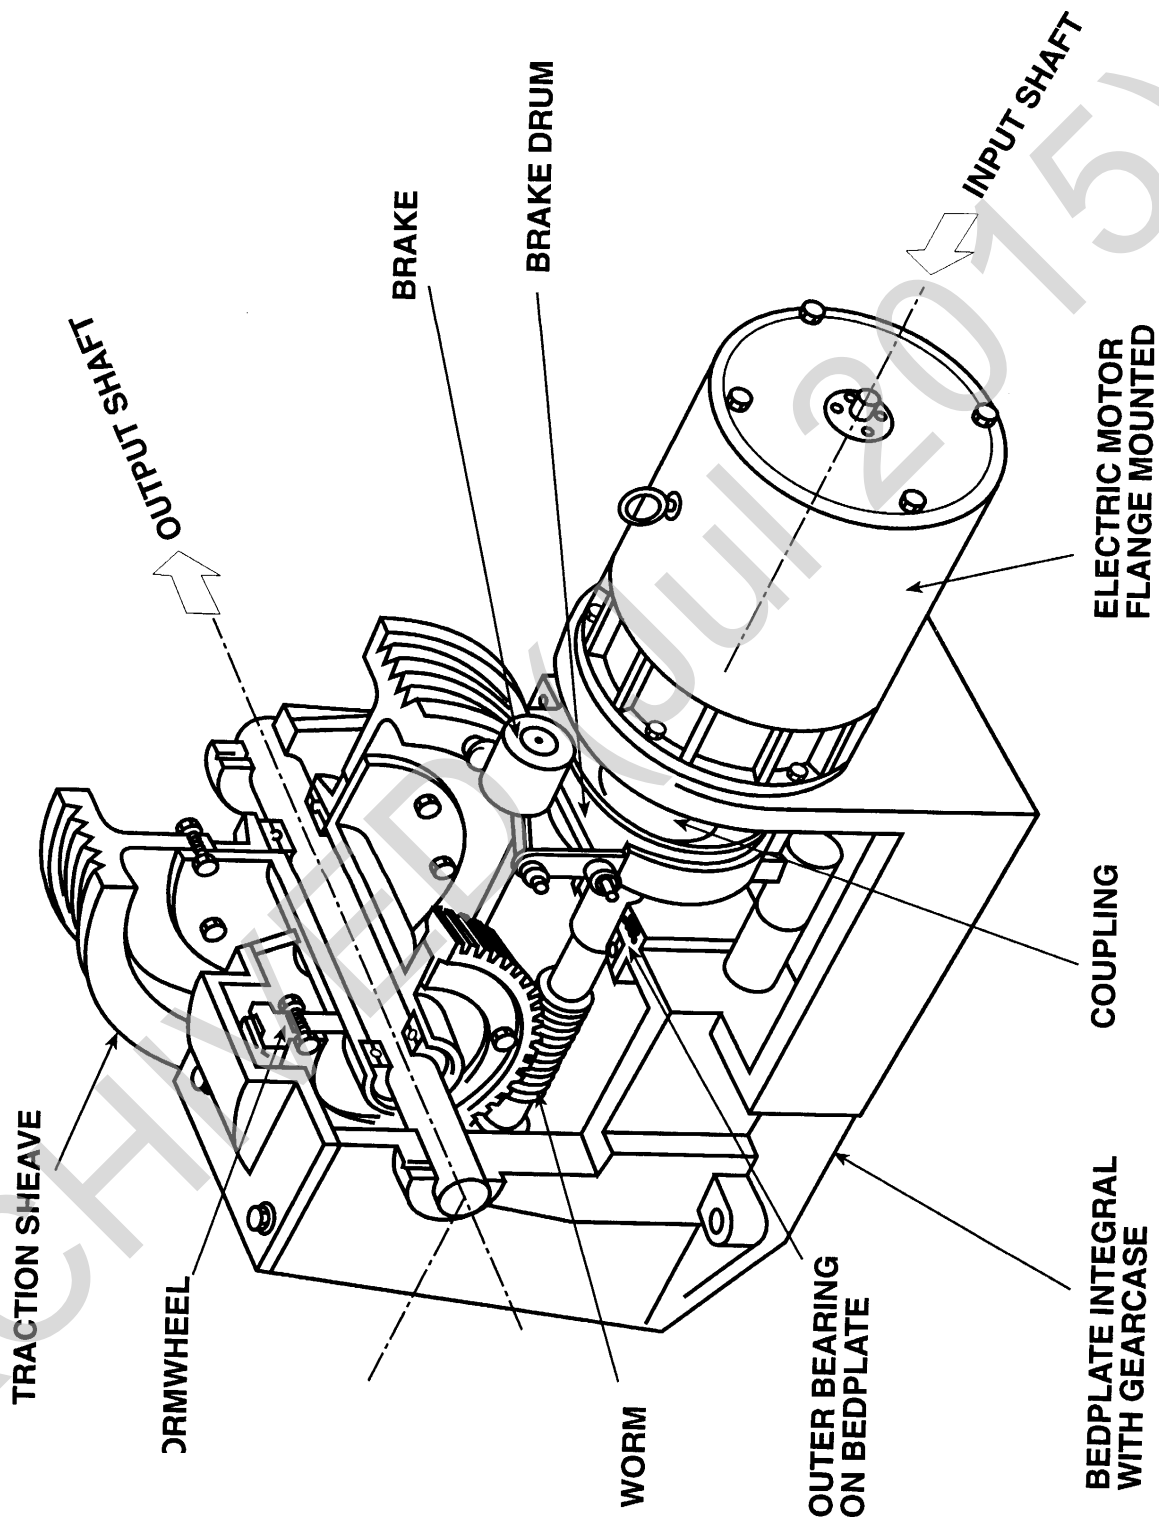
Typical arrangement of geared lift machine (courtesy of NALM)
